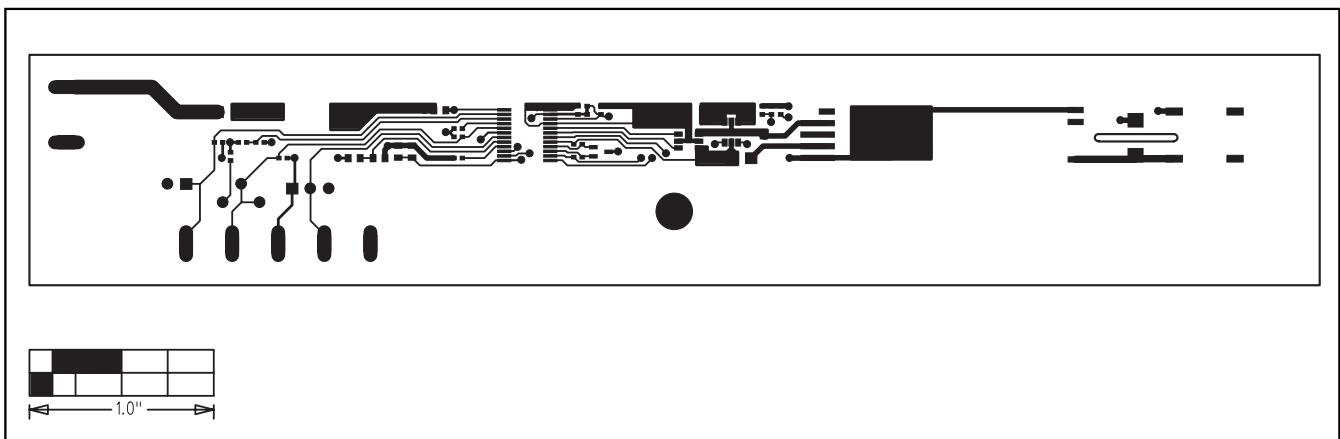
MAX8722 EV Kit PC Board Layout—Component Side
